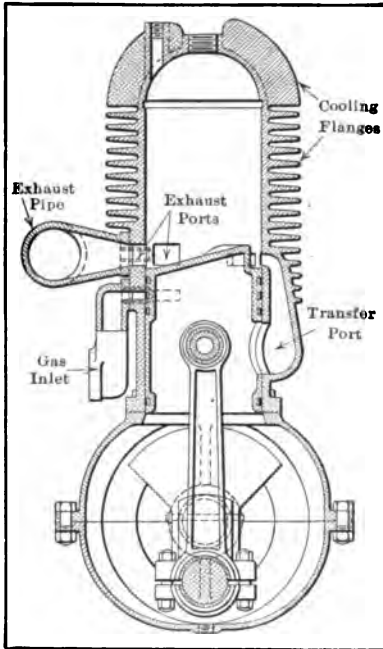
Sectional view of Chase two-cycle engine, a two-stroke form successfully cooled by air flanges cast integral with cylinder.
